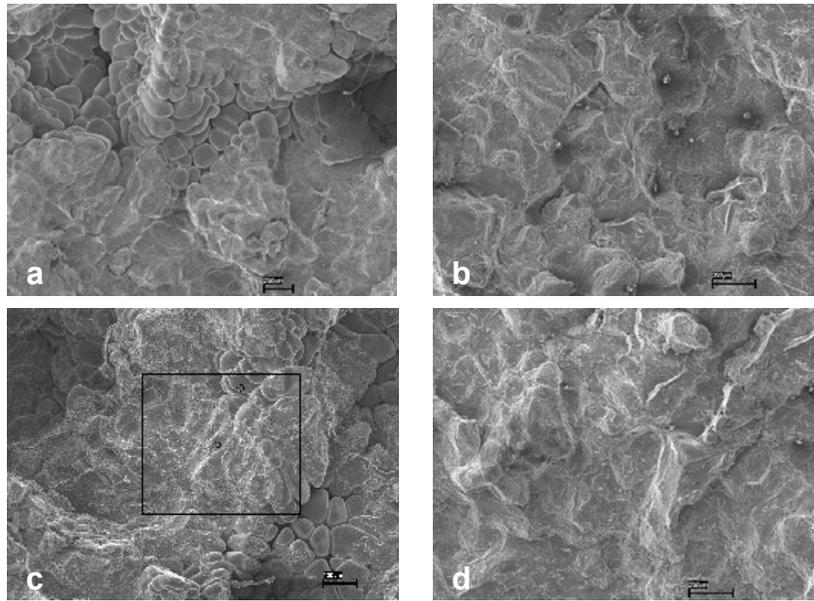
Shape of fracture surface the specimens. a) sample by mold with copper b) sample by mold with steel.
